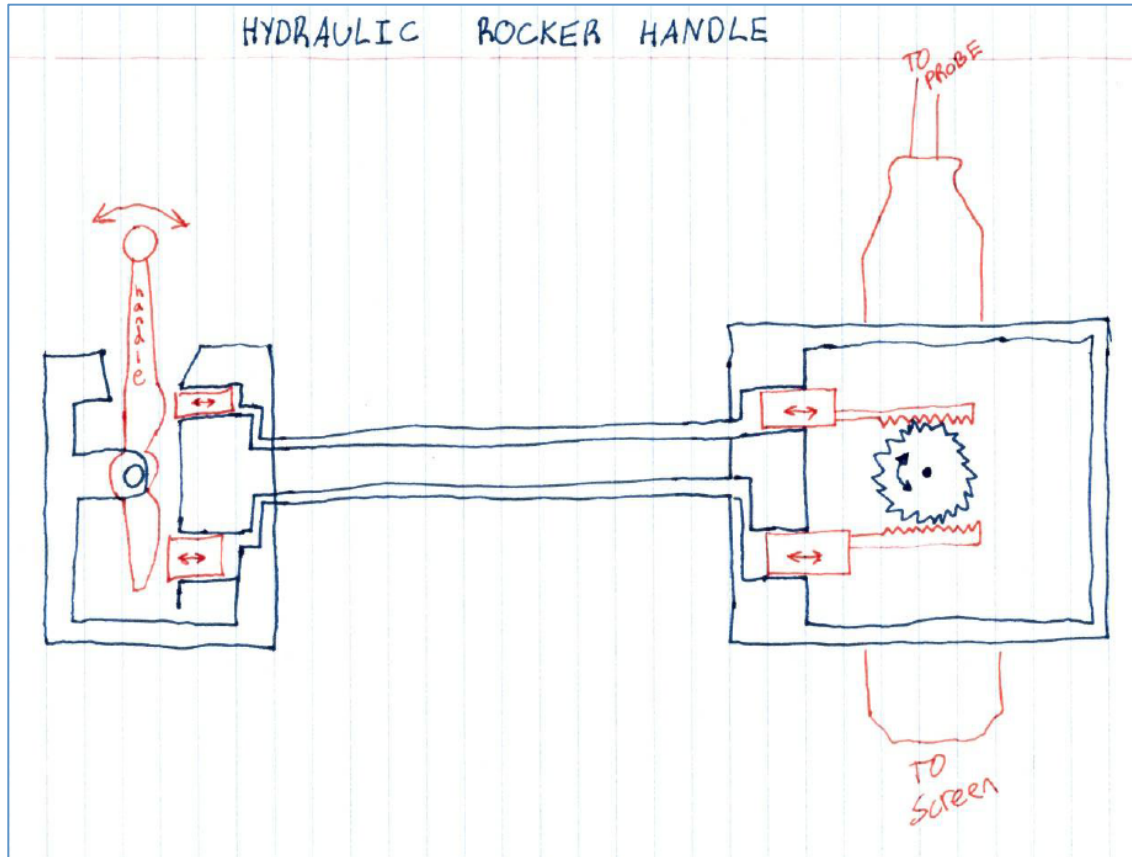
Rocker handle hydraulic system. The user interface of the system would be a handle that can rock back and forth. The handle would actuate fluid flow of a closed hydraulic system, which would control racks of a rack and pinion system at the TEE interface. The rack and pinion at the TEE interface would control the shafts of the TEE handle that control the movement of the TEE probe.
